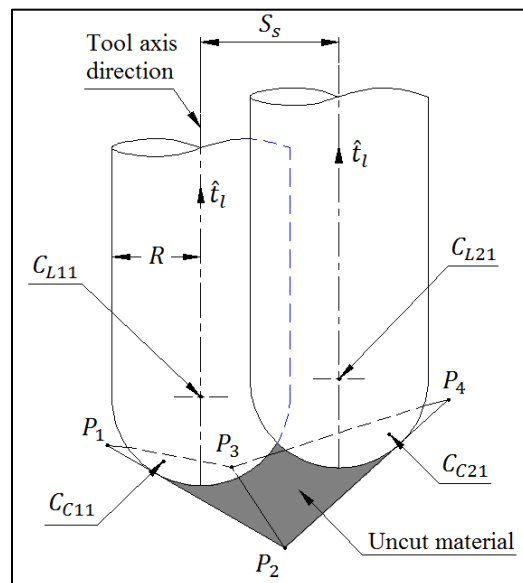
Cutter location and cutter contact points on adjacent tool paths
